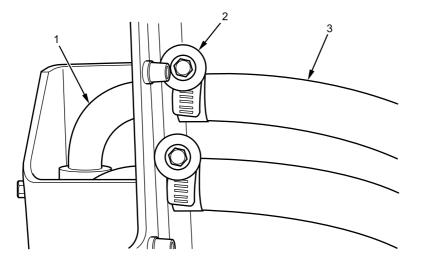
Heater Radiator Inlet Hose Inside LSS Box at Panel.
